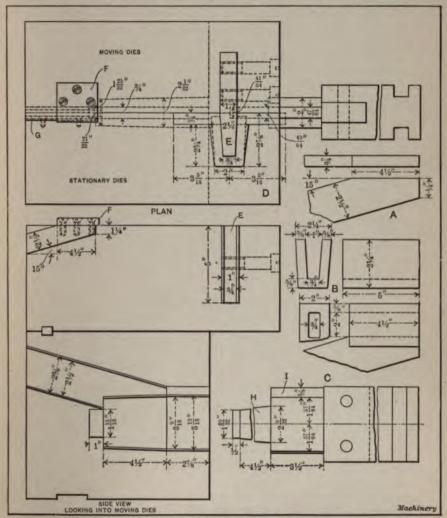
Forging Machine Dies and Tools for making Extension Handles for Grate Shaking Levers
